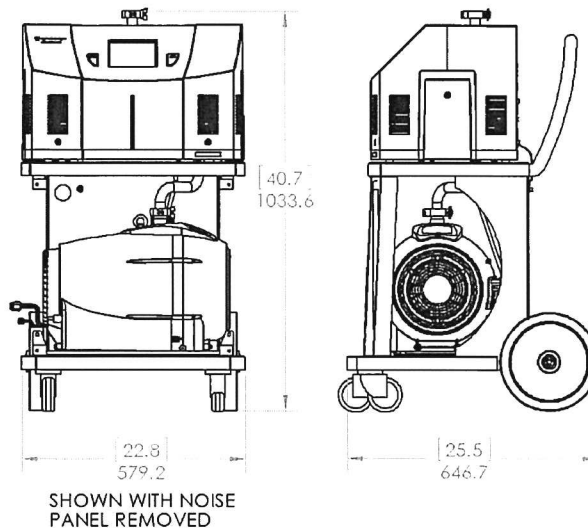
Mobile Leak Detector with External IDP-15 Dry Scroll Pump on a Cart, Model VS MD15, Dimensions
